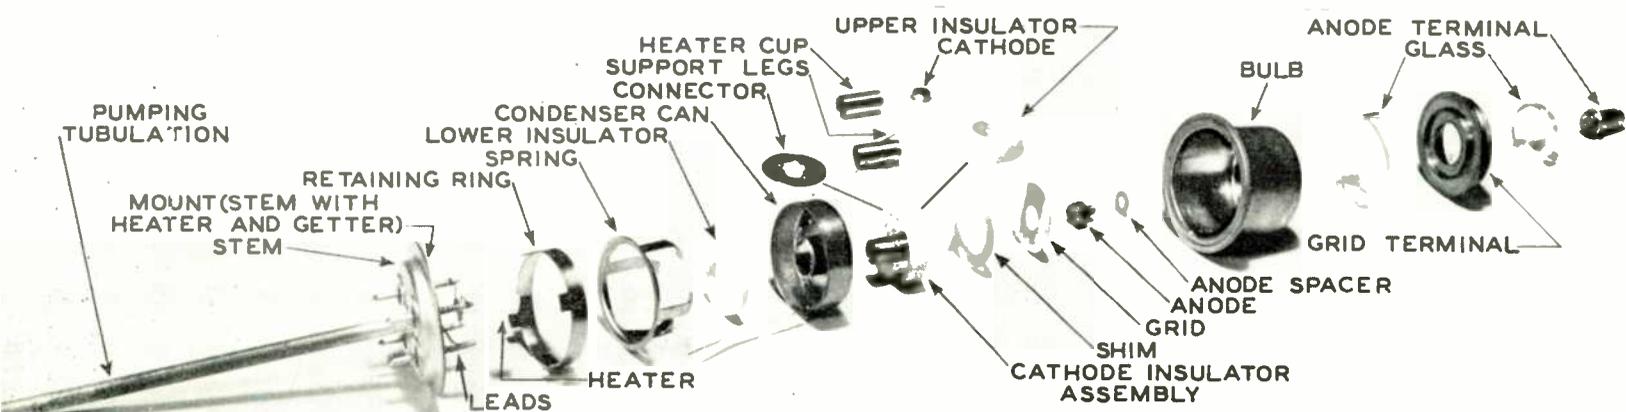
Parts which make up the 416A triode. Cathode insulator assembly, center, is composed of the parts shown above it
